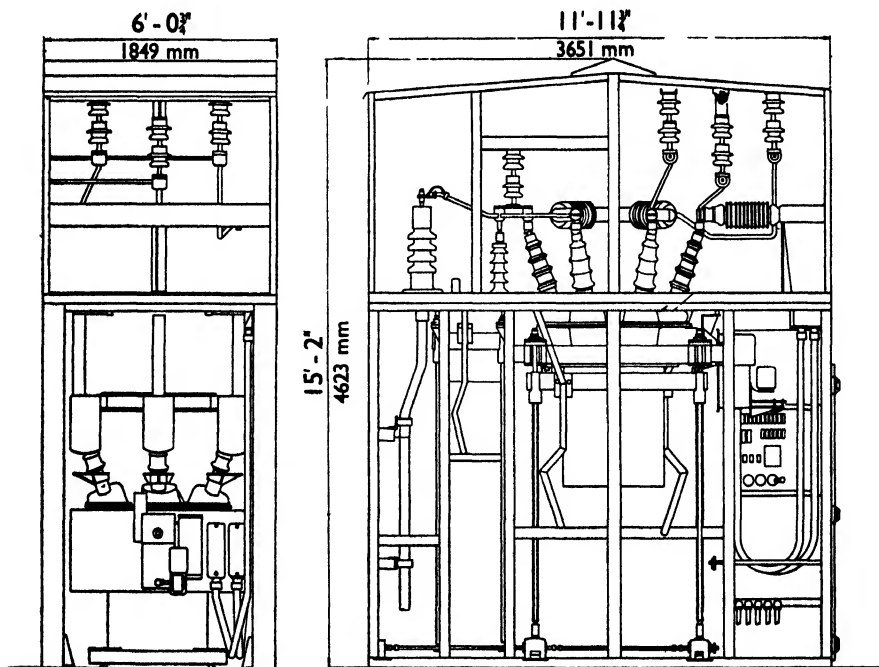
Sectional view of 33 kV packaged switchgear unit with single busbars. (South Wales Switchgear Ltd.).
